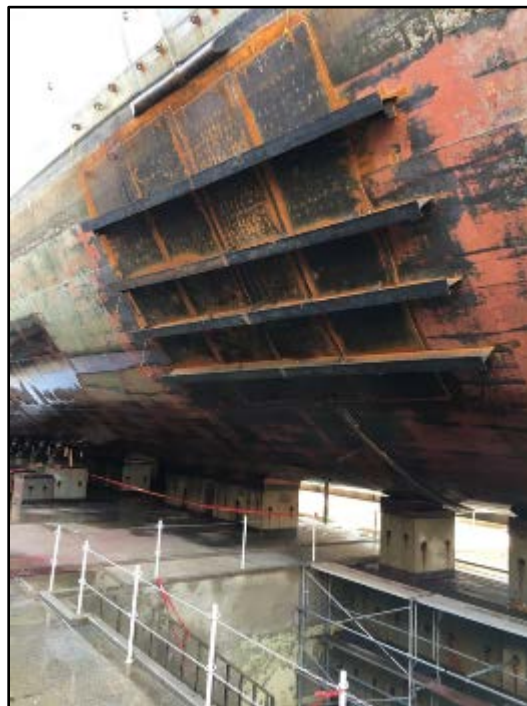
View of Fitzgerald's welded patch after dry docking.
